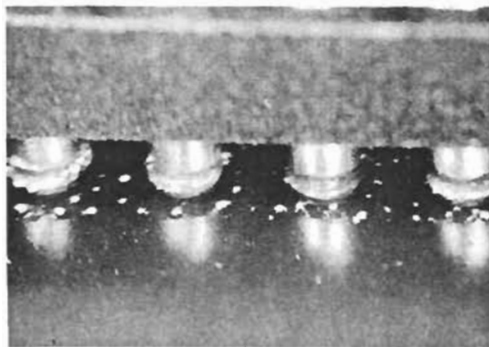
Solder balling on resist with pin-in-hole-reflow (EPS)
